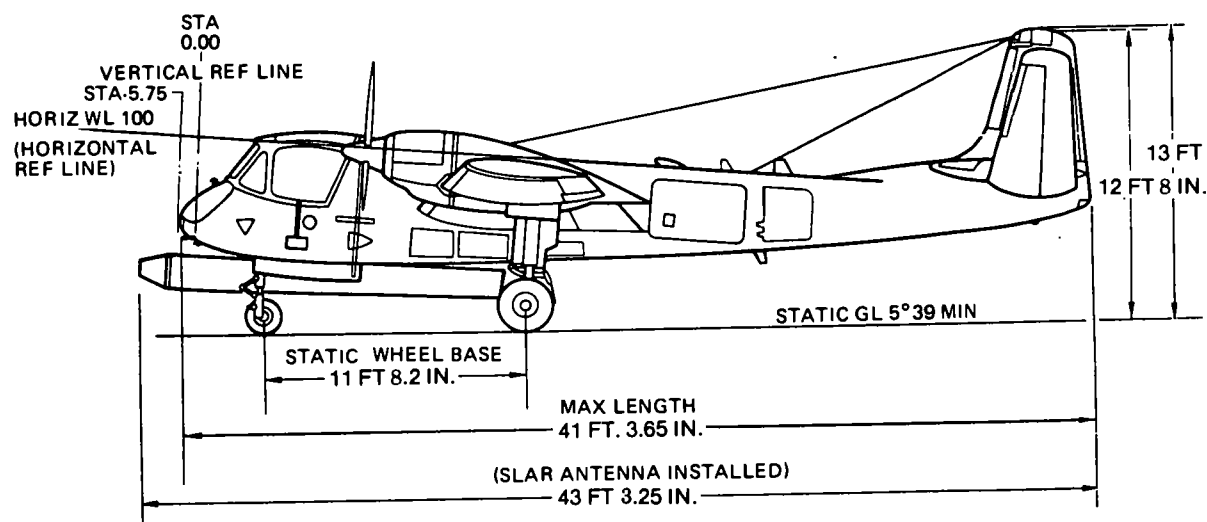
Principal Dimensions, OV-1D (Mohawk)
